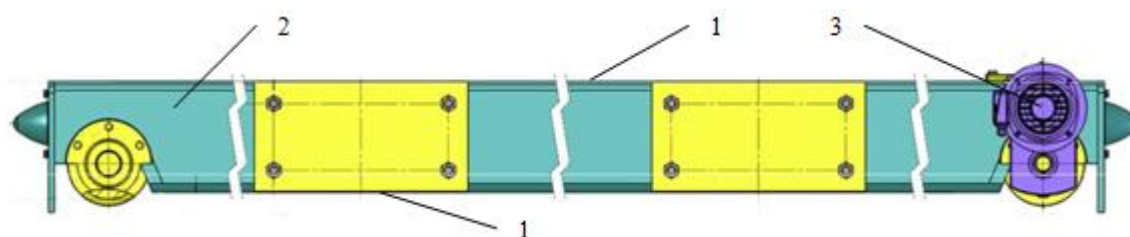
General view of a typical metal structure of the end beam of a double-girder overhead crane: 1 — upper and lower belt; 2 — vertical walls; 3 — crane mounting
